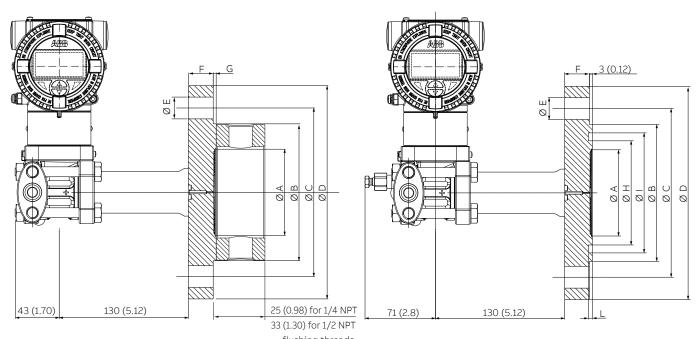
266DRH with barrel housing and direct mount seal S26FA/528FE4FACC<sup>adS</sup> Figure 15 flange Raised Face flush diaphragm ASME and EN 1092/1 smooth and Form B1 (flushing ring as option, only for flush version); Form E (For dimensions of S26 seals refer to the S26 datasheet)
